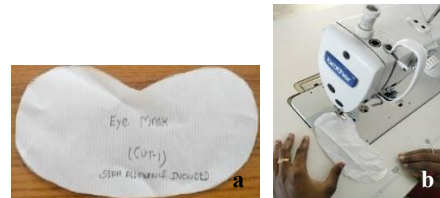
(a) Pattern making and drafting (b) Cutting, Machining and Trimming
